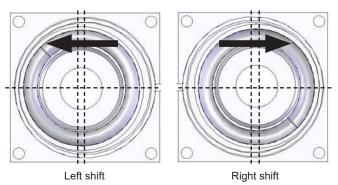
Top View of Main Spring & Spring Flange showing examples of Main Spring & Spring Flange shifting; in addition to right and left, springs may also shift up or down (certain components hidden for clarity)
